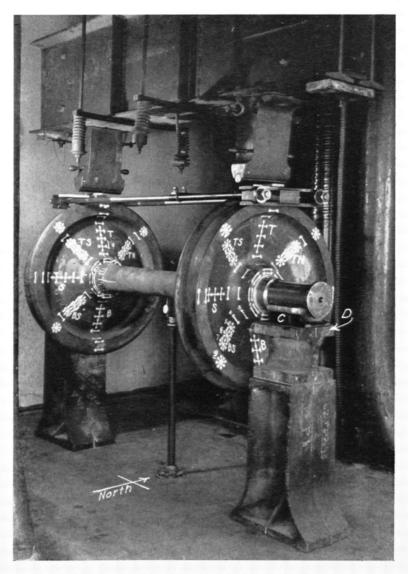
WHEEL AND AXLE ASSEMBLY SUBJECTED TO VERTICAL LOADS AND FLANGE THRUSTS C is a casting having a curved bearing surface in contact with D to allow rotation of axle caused by deflection.
